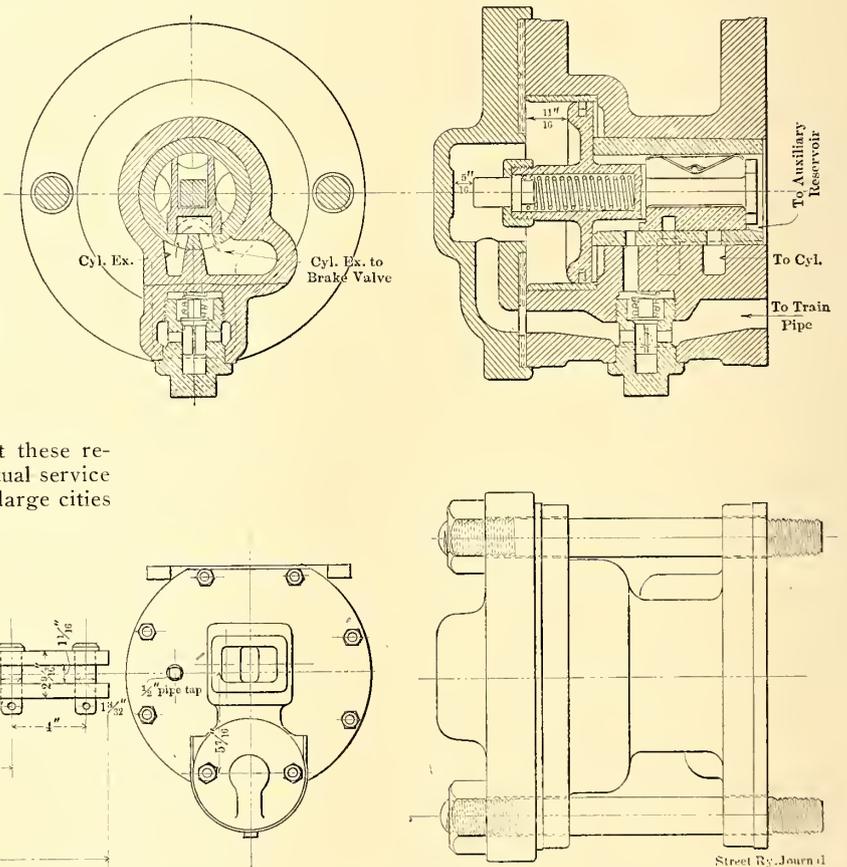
SECTIONS AND OTHER DETAILS OF SURFACE TRACTION TRIPLE VALVE
